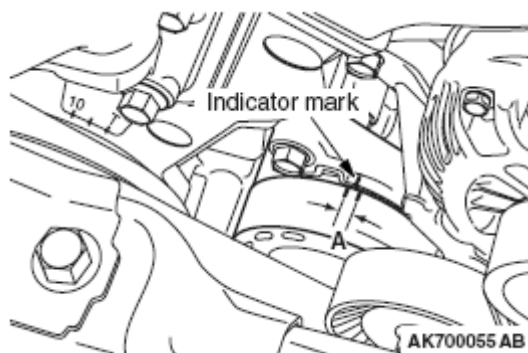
Identifying Indicator Mark On Auto-Tensioner Is Within Marked Area A
